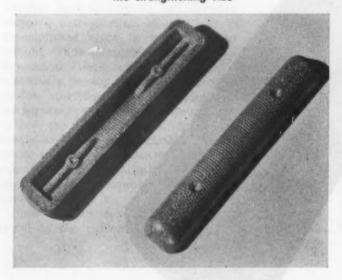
Above — Insulating wire clamp is example of molded-laminated part in which uniformly shaped laminae are used in stack-up, being pressed to varying thicknesses required within the mold
